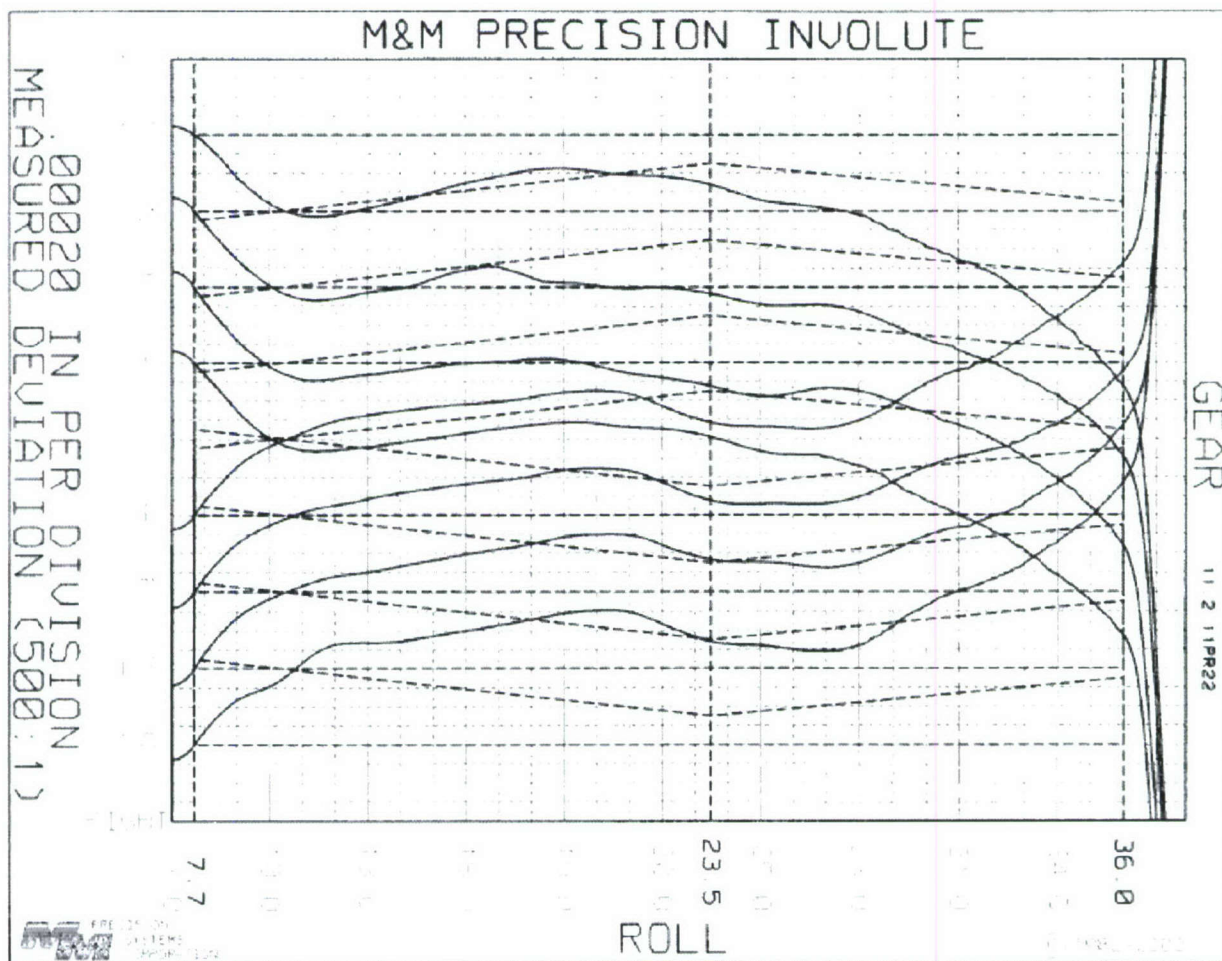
Gear tooth profiles on ausform finished, Standard test gear (grind 3)
